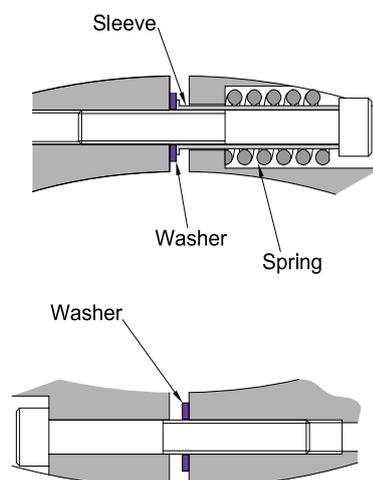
Rope Guide Inner Band Spring and Sleeve Arrangement
